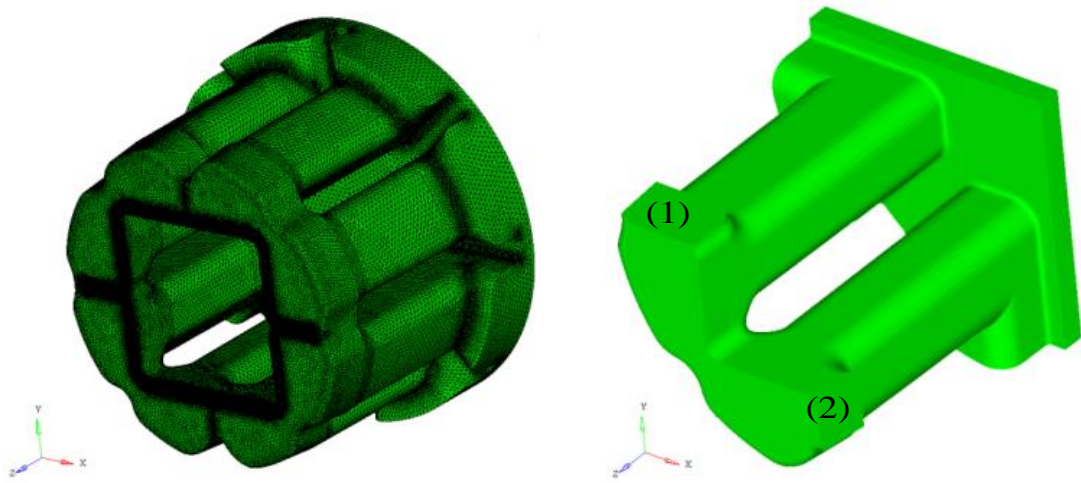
The entire mesh model of portholes and welding chamber filling and bearing (left) quarter of the model showing the weld zone (1) and (2) (right).
